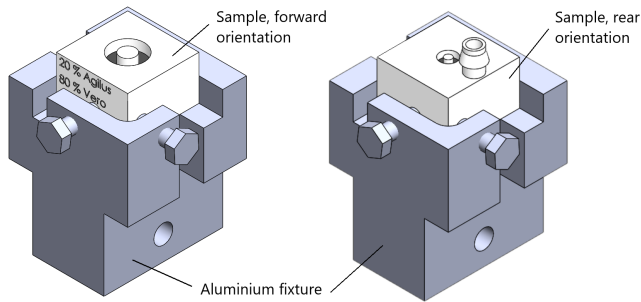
Rendering showing the aluminium fixture and the driving mechanism used for the spring measurement testing. Both the front and rear orientation of the sample are shown.
